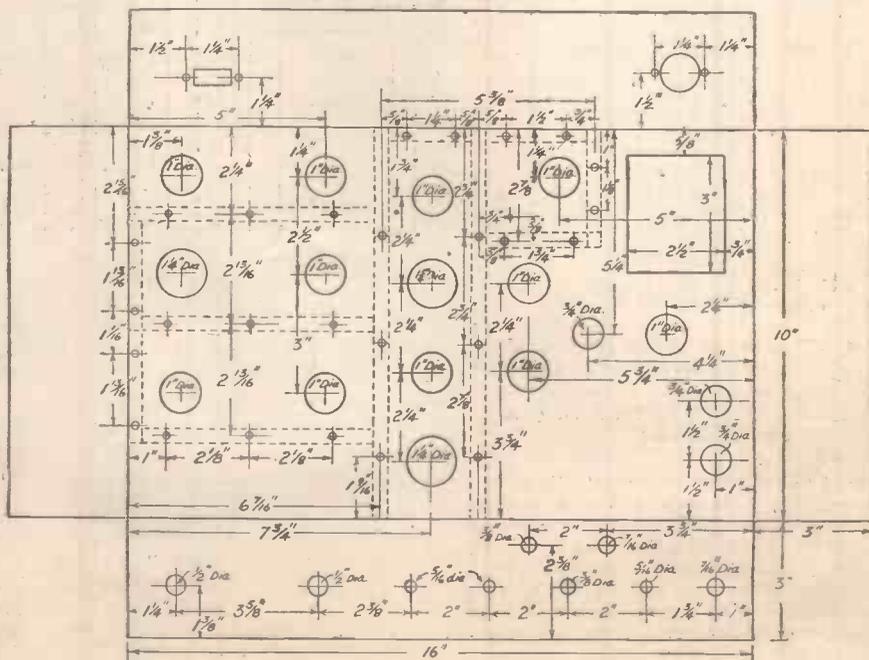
Drilling and cutting dimensions for the chassis of the Air-Hawk 9.
